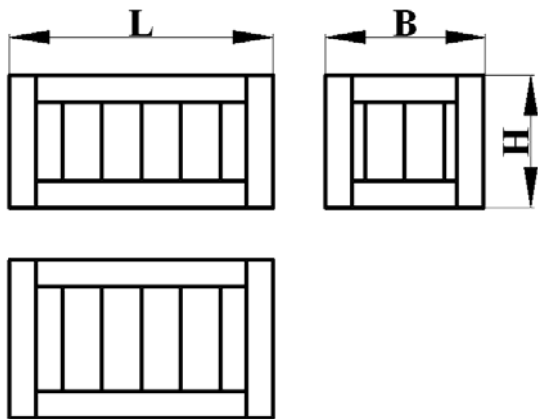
b. The transversal orientation of the lamellas in the panels of the box structure
